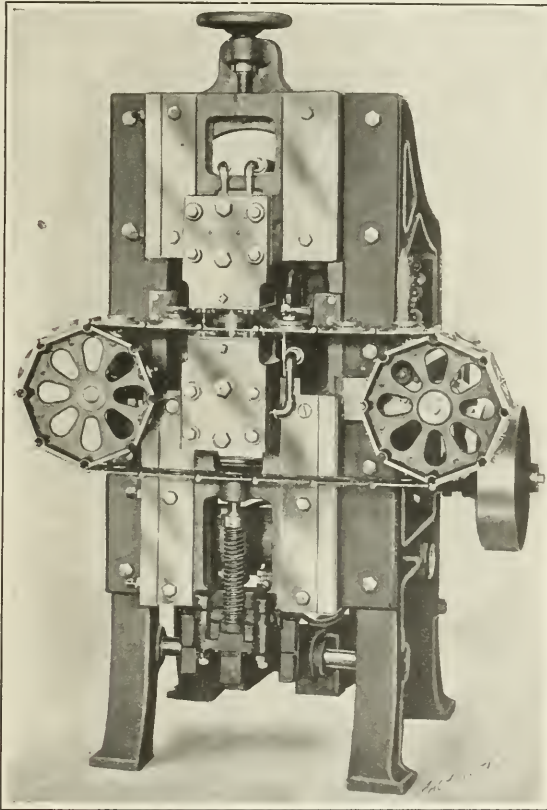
Special Electric Seam Welding Machine built by the Universal Electric Welder Co.
